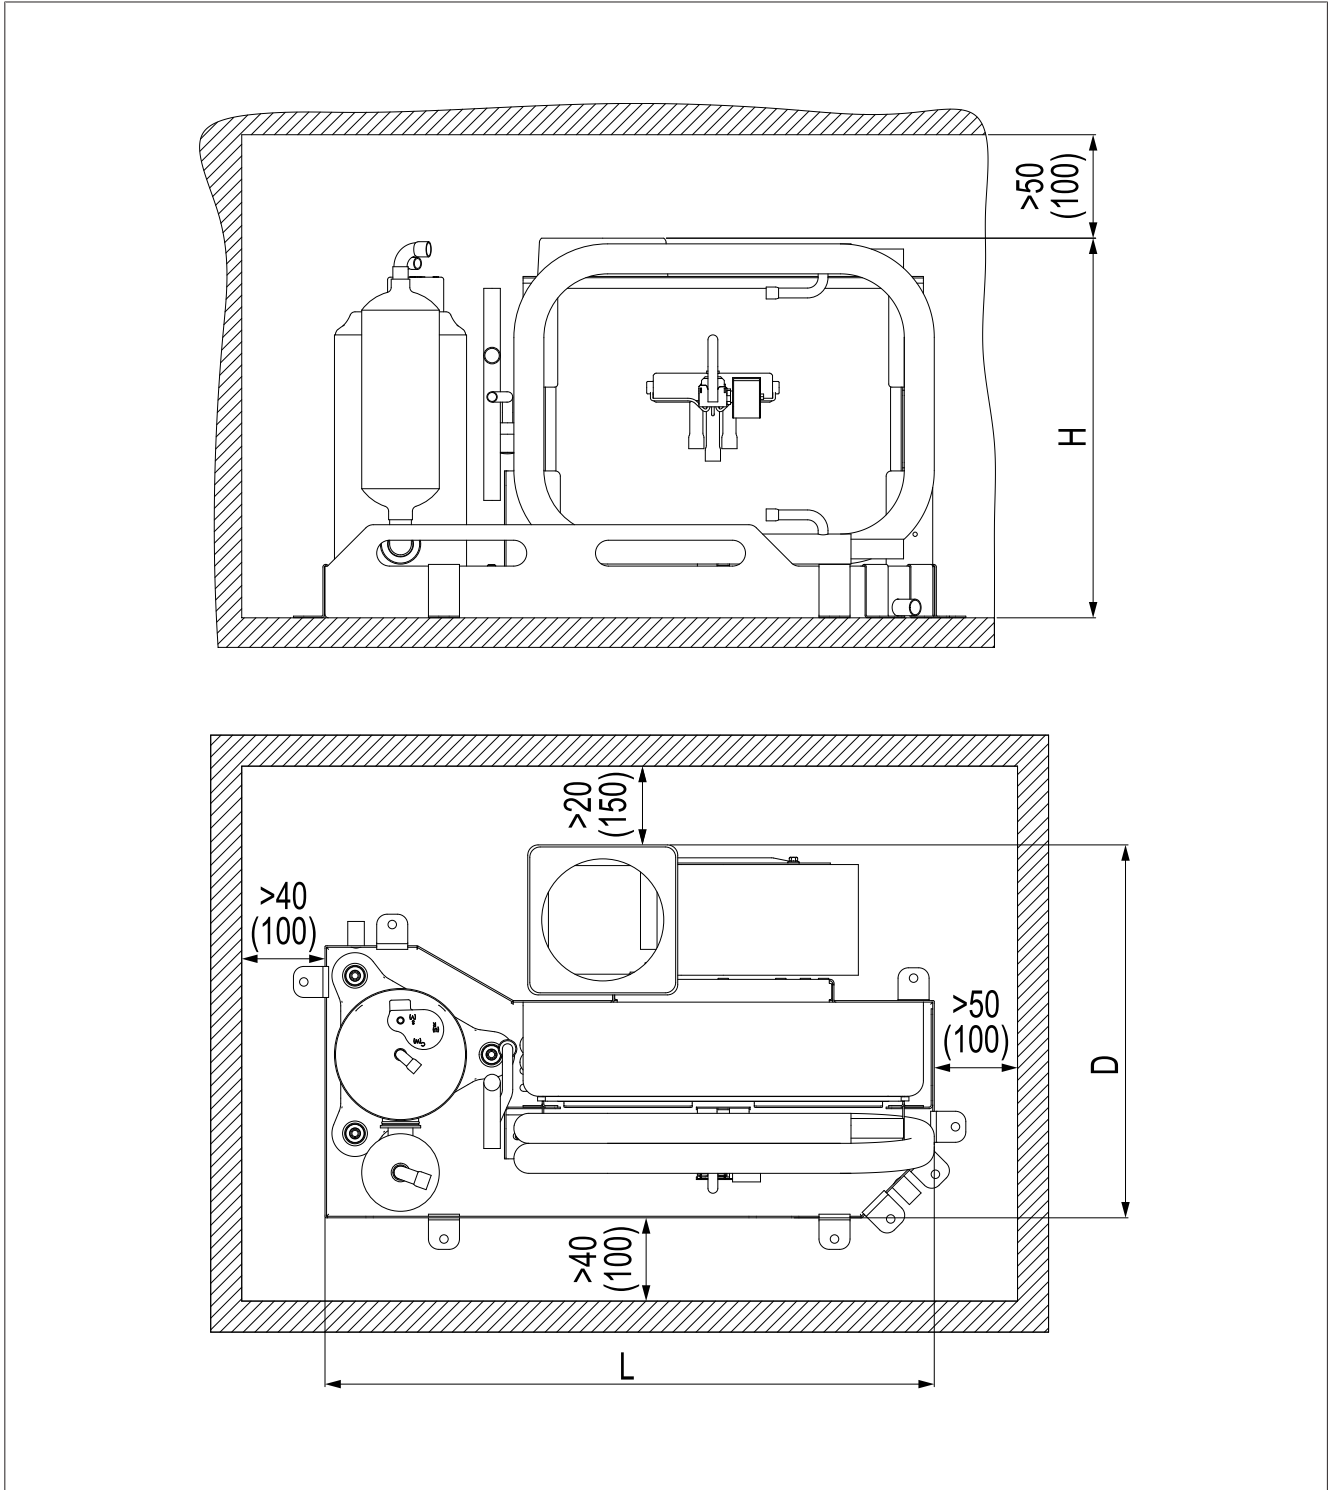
Dimensions and minimum distances Type 6K- 16K (mm)
